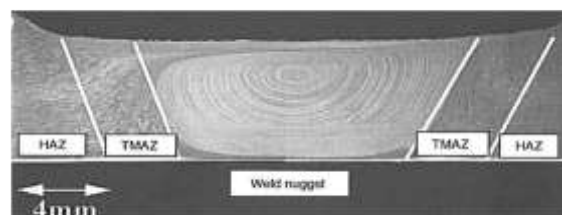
Representation of Friction Stir Welding Method [3]
